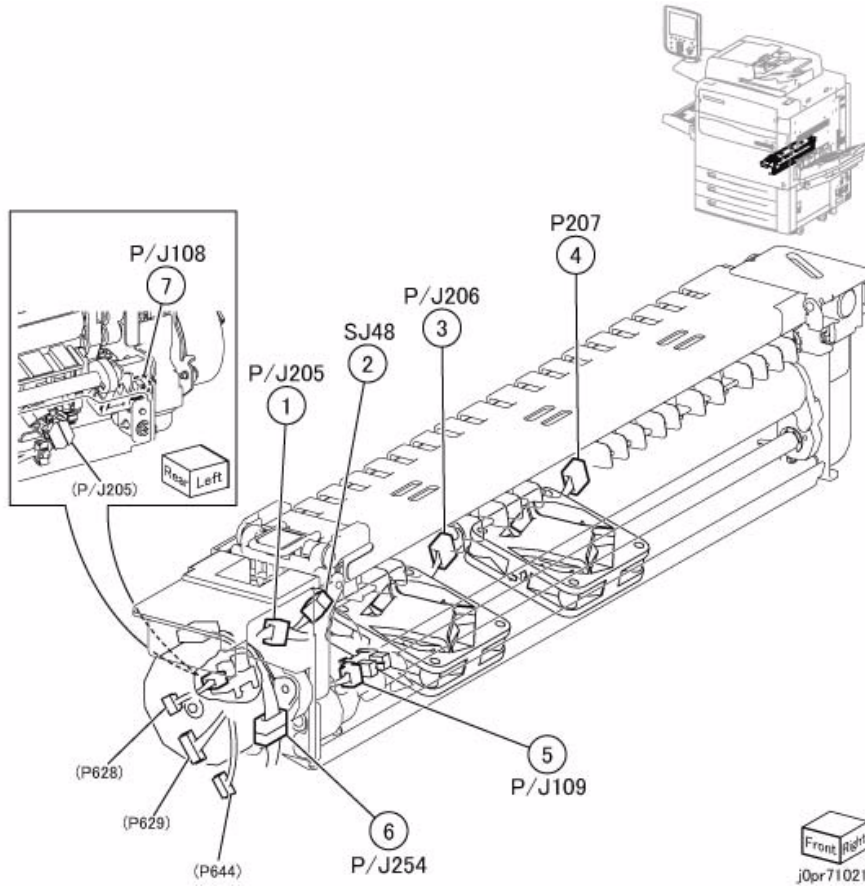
DECURLER ASSEMBLY (j0pr71021)
